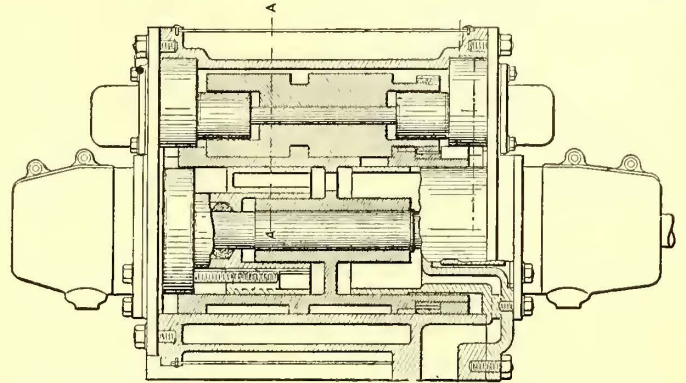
LONGITUDINAL SECTION OF WARREN ROTARY ENGINE
